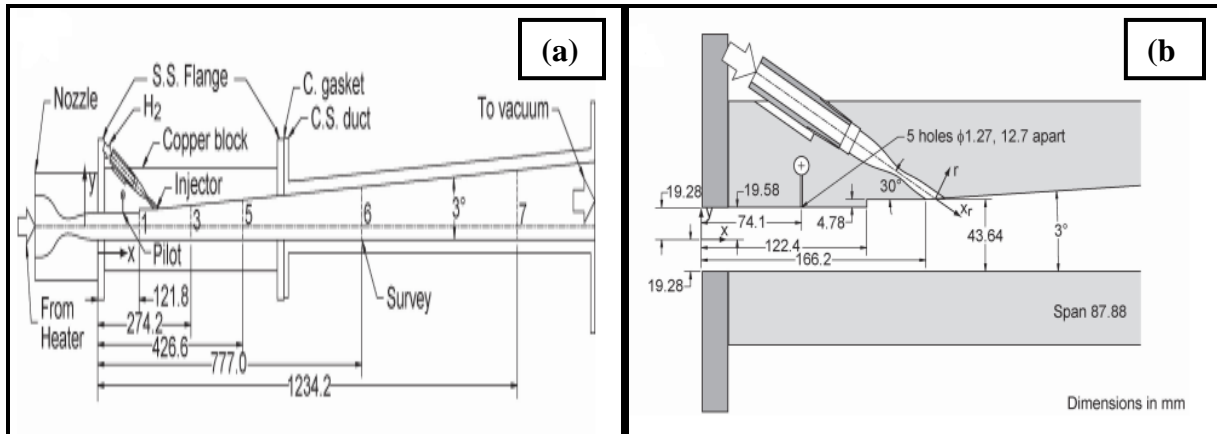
Fig. 2 Layout of NASA’s Scholar scramjet combustor: (a) nozzle and complete combustor, (b) detailed view of the main injector region (all dimensions are in mm) [90]
